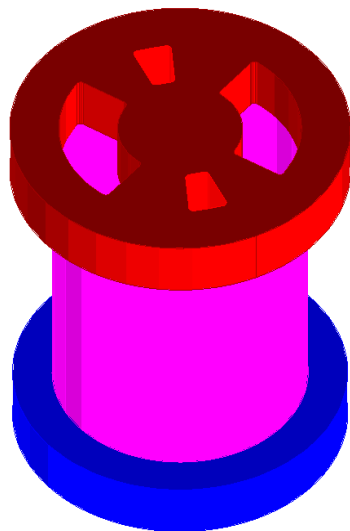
PWS cold air (blue) and hot gases (red) side CAD geometry.
